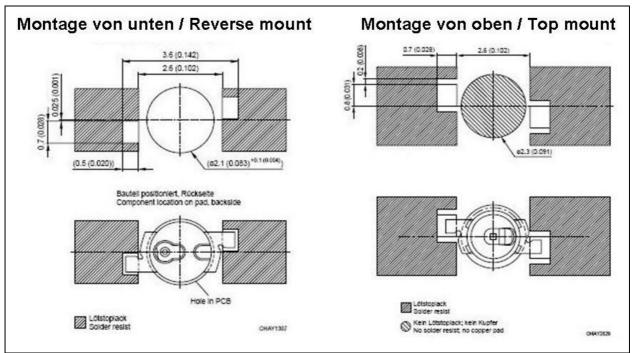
Solder pads of the PointLED[®] for top – and reverse mounting
